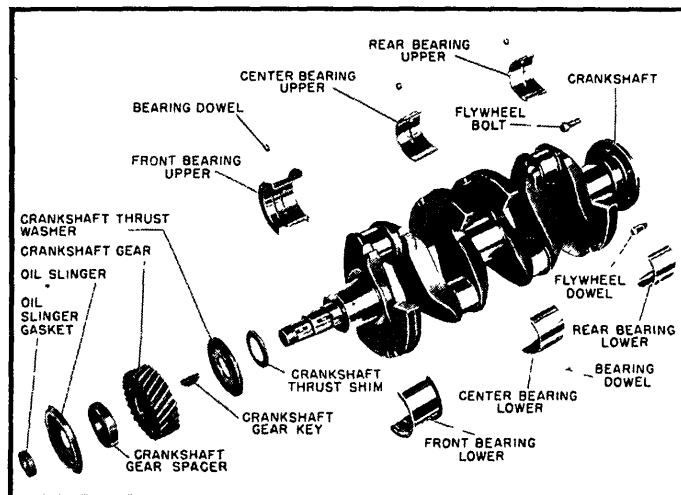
Layout of crankshaft and related parts. 1946-52 four cylinder engine
